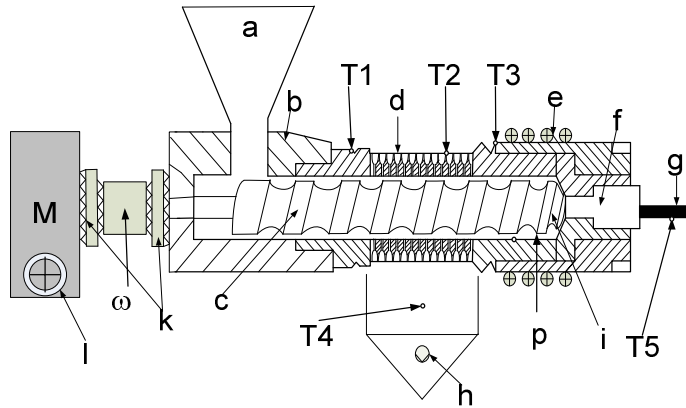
Screw press (cylinder-hole type) for oil extraction and installed sensors, (a) feeding hopper, (b) housing, (c) screw press, (d) oil outlet holes, (e) heating, (f) nozzle, (g) press cake outlet, (i) cohesion zone, (h) oil collector, (k) coupling, (l) speed alternator, (M) motor, (T1-T4) temperature sensors, (T5) temperature sensor (IR), (p) pressure sensor, (ω) rotational velocity
